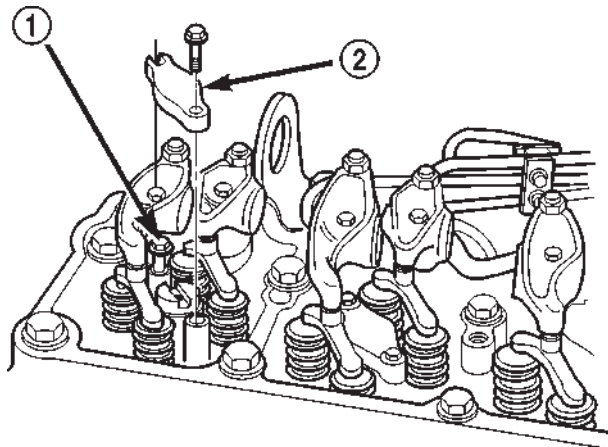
Rocker Arm and Crosshead Removal/Installation
